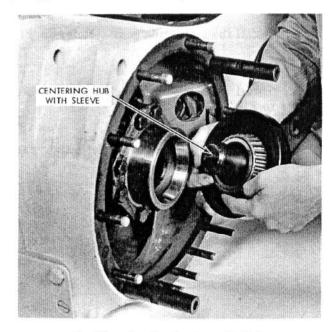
Locating Bearing on Centering Hub (Non-Diff. Lock)
